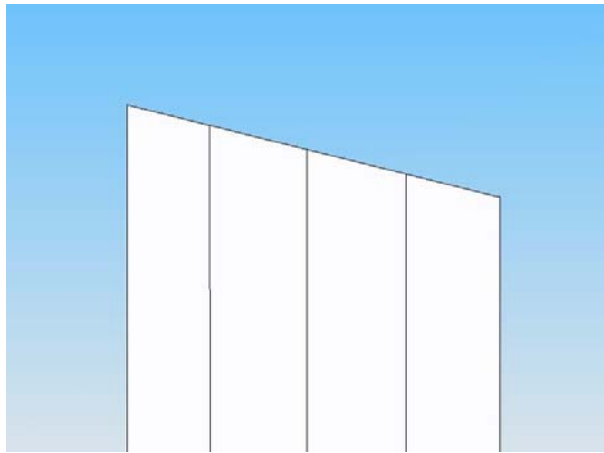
Exaggerated top view sketch of specimens after initial polishing.
